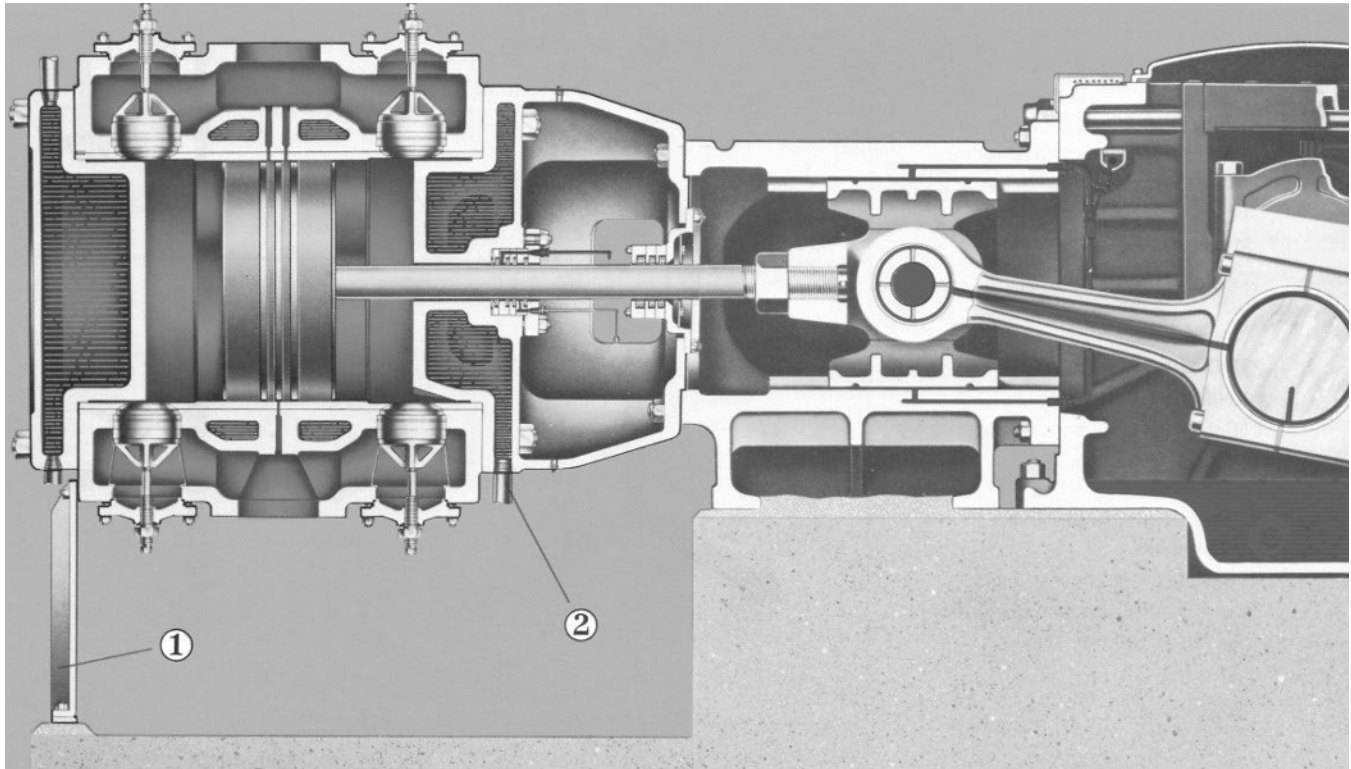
Partial cross section showing “cold” cylinder support (1), crank-end cylinder head and drain (2), piston and piston rod, sliding crosshead, and connecting rod. (Source: Dresser-Rand Company, Painted Post, New York.)
